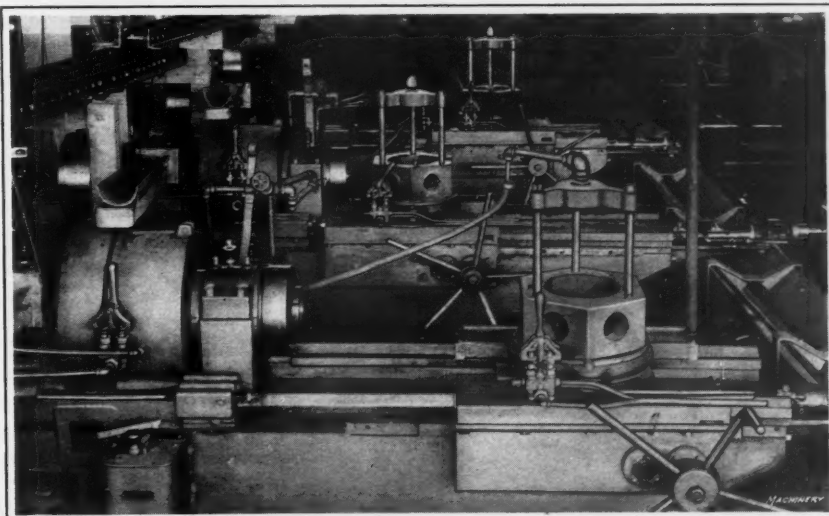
Set of Three Machines for rough-reaming, finish-reaming, and finishing Inside Bottoms of Shells
